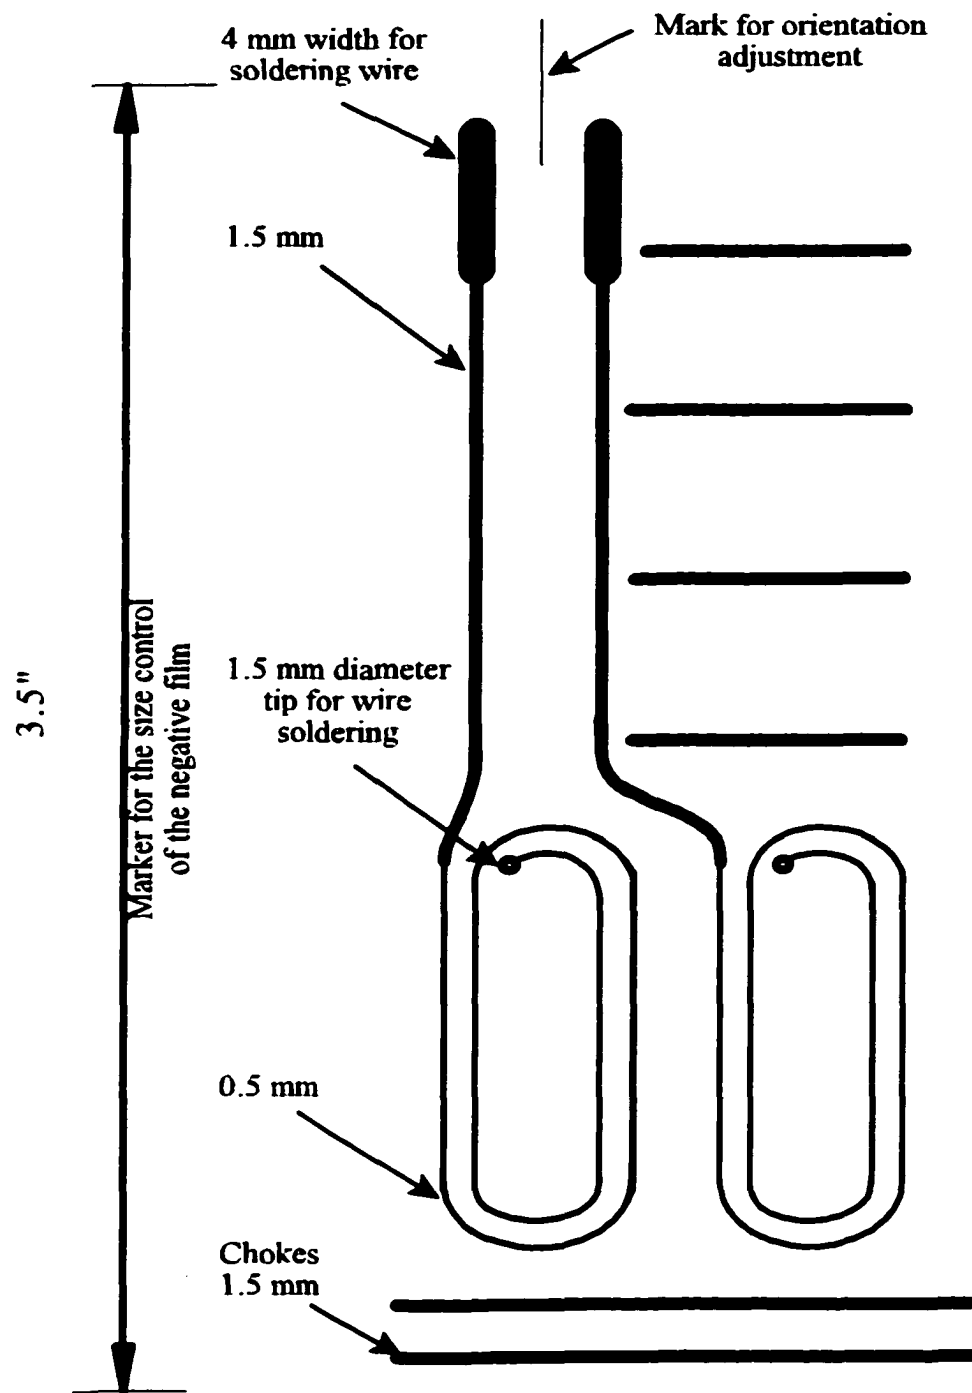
The drawing of the designed front side ENDOR coil. The negative film would be $\frac{1}{2}$ this size. (3.2.wpd)
